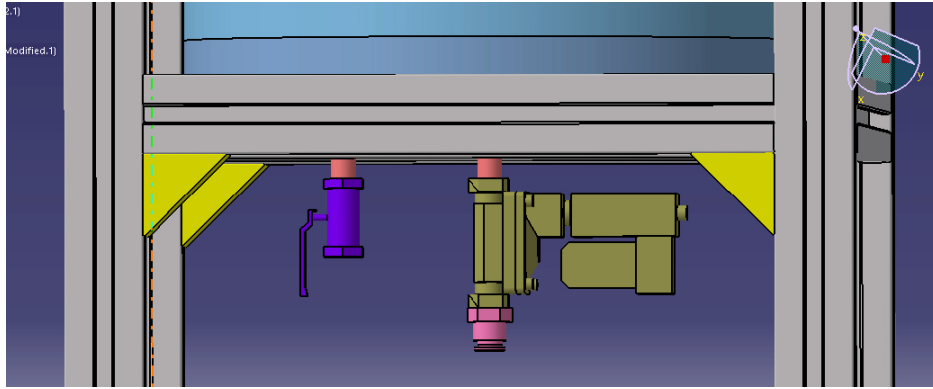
Test cell components which are mounted in the bottom of the pressure vessel
